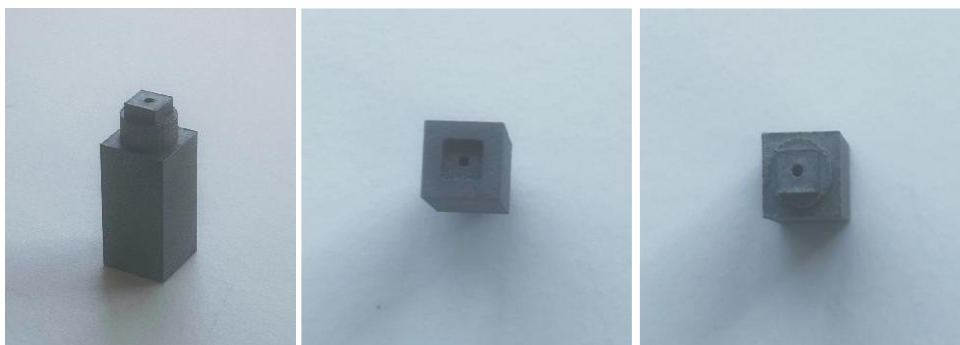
316 stainless steel microfluidic module printed via Binder Jetting through services provided by JLCPCB [126]. The thickness of the microchannels is 850 μm . Left: Overview of the part; center: View of the lower finish; right: View of the upper finish.
